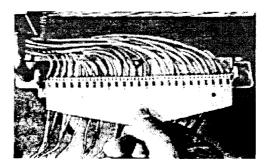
Adjusting Tool for Seating and Cutting Conductors From Index Strip
